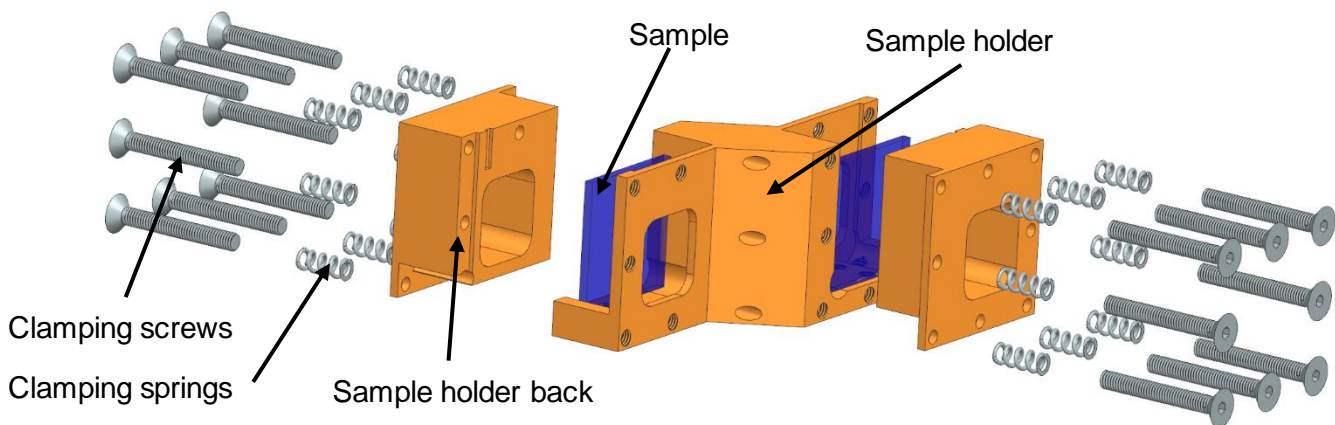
Exploded view of the sample holder design. With all the parts, screws, springs, backplate, and sample visible.
